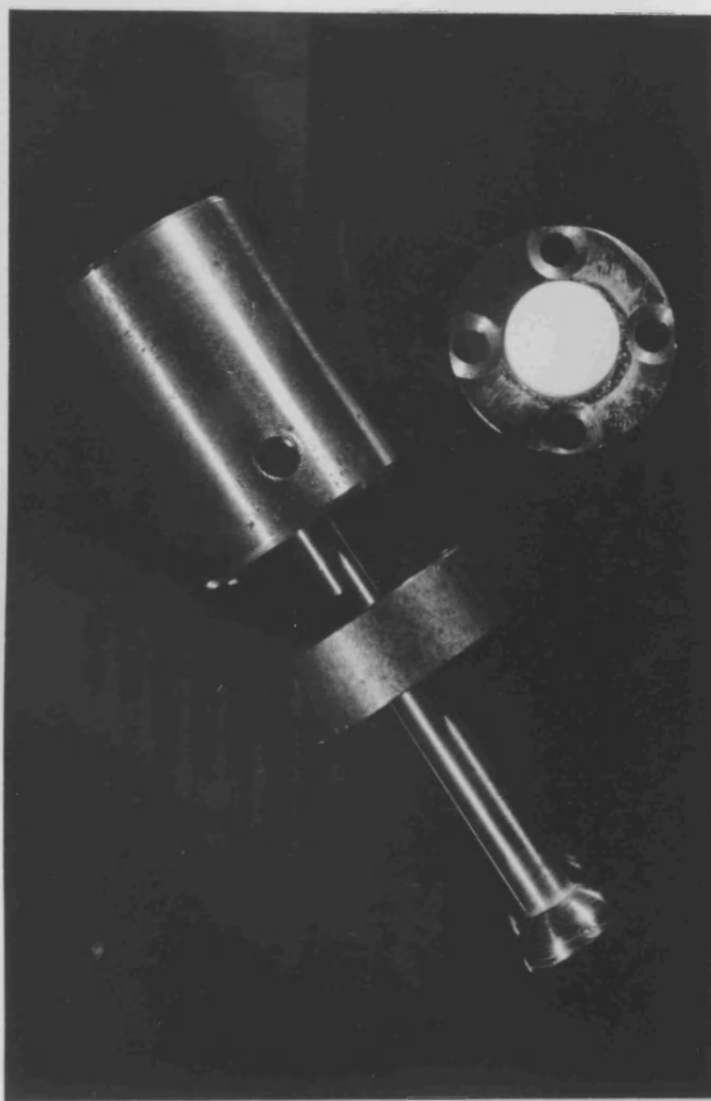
Ball and socket assembly used during direct tension testing of tablets to ensure axial alignment.
